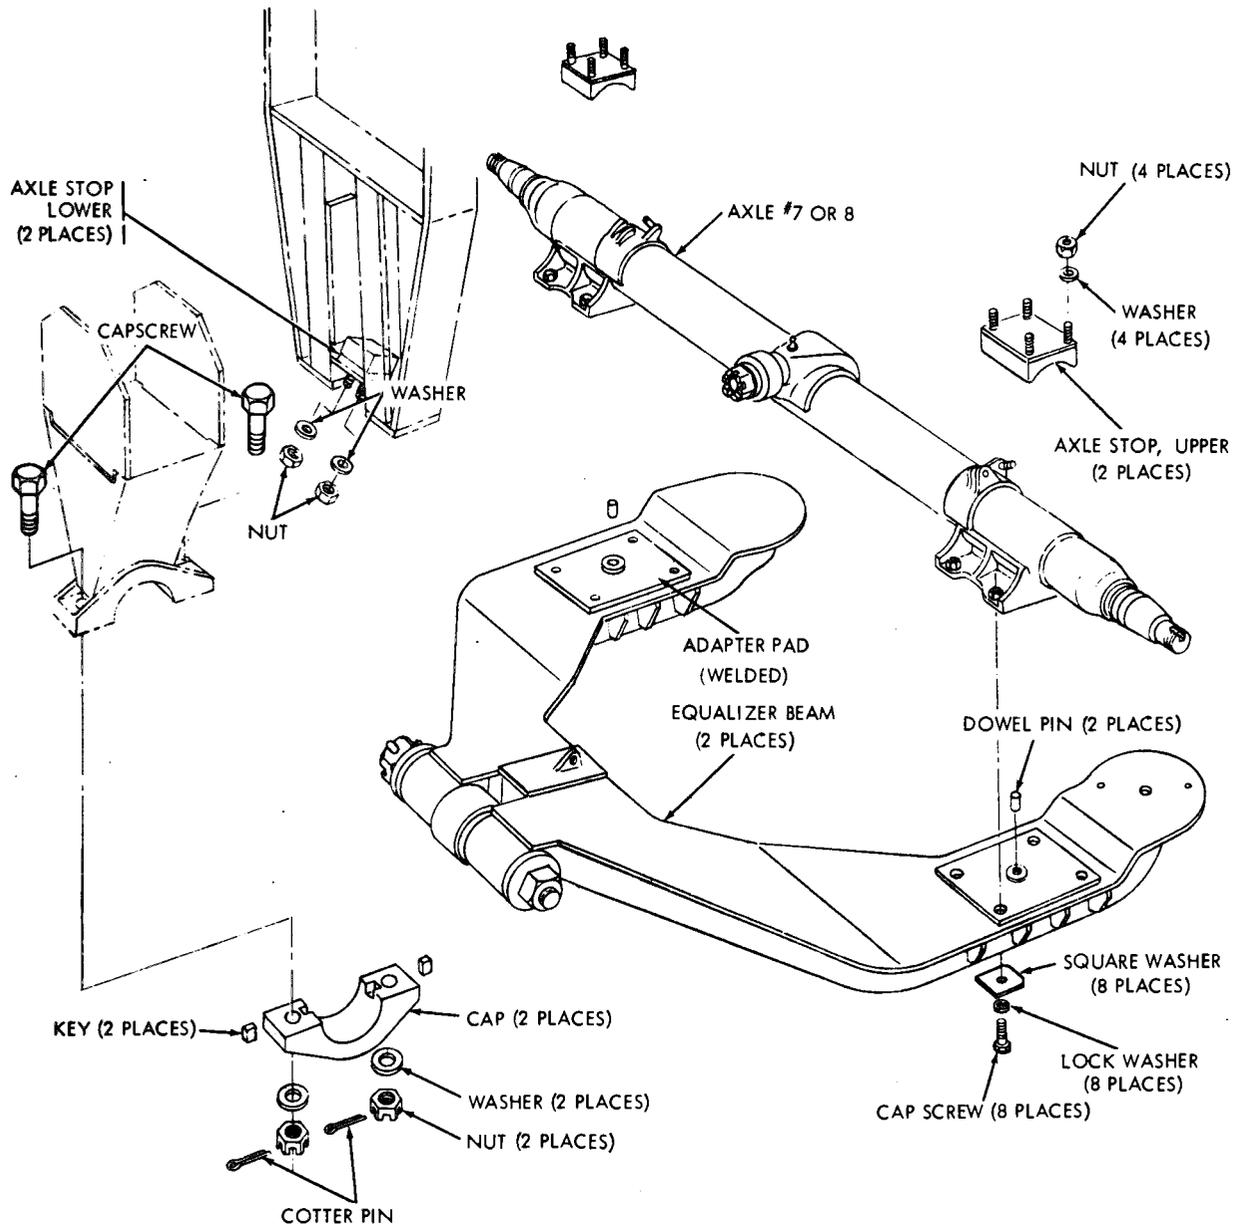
Rear axle-equalizer beam assembly-exploded view.
